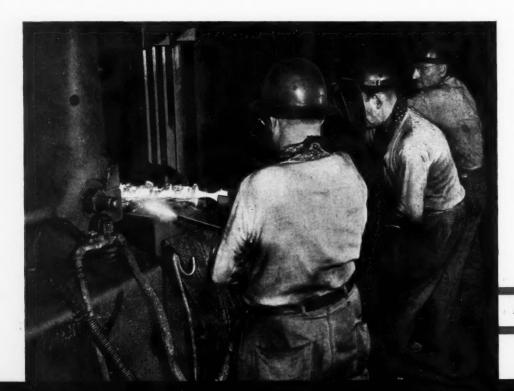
A Single-impression Die, Mounted on a 10,000-pound Steam Hammer, Finish-forges Crankshafts for Six-cylinder Engines at Forty-five per Hour
